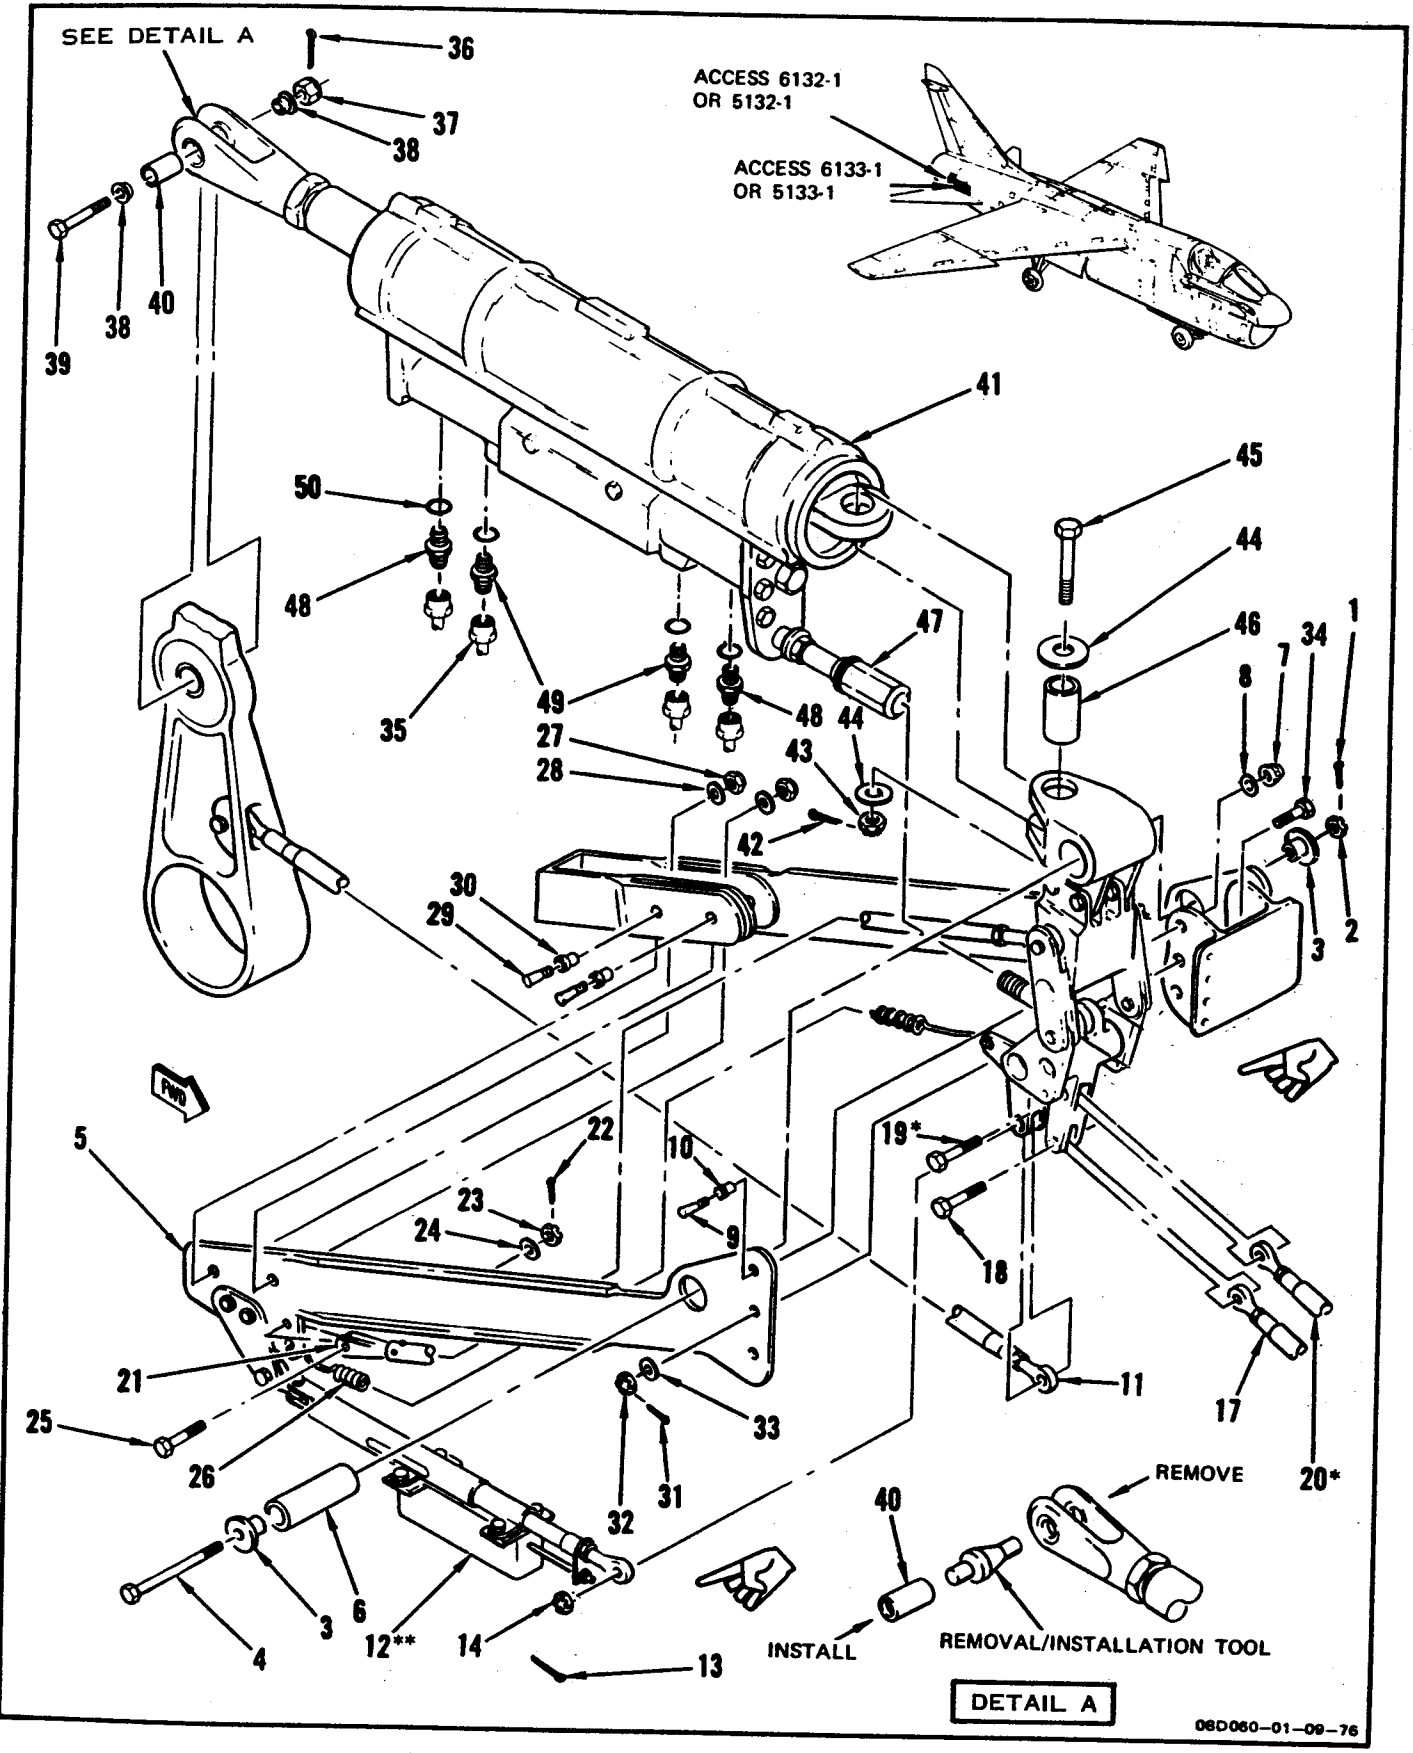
UHT PC Cylinder Removal and Installation (Sheet 1)
